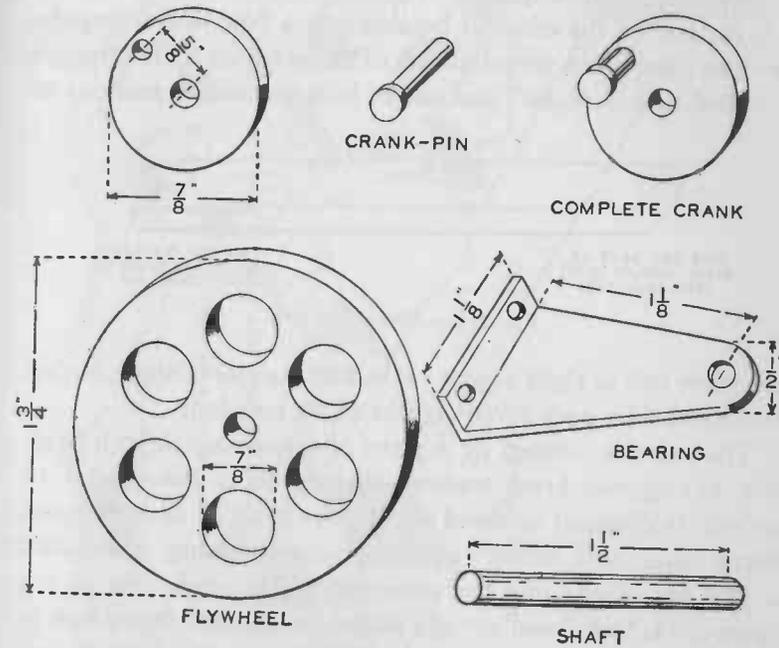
Details of the flywheel, crank, shaft and bearings.
